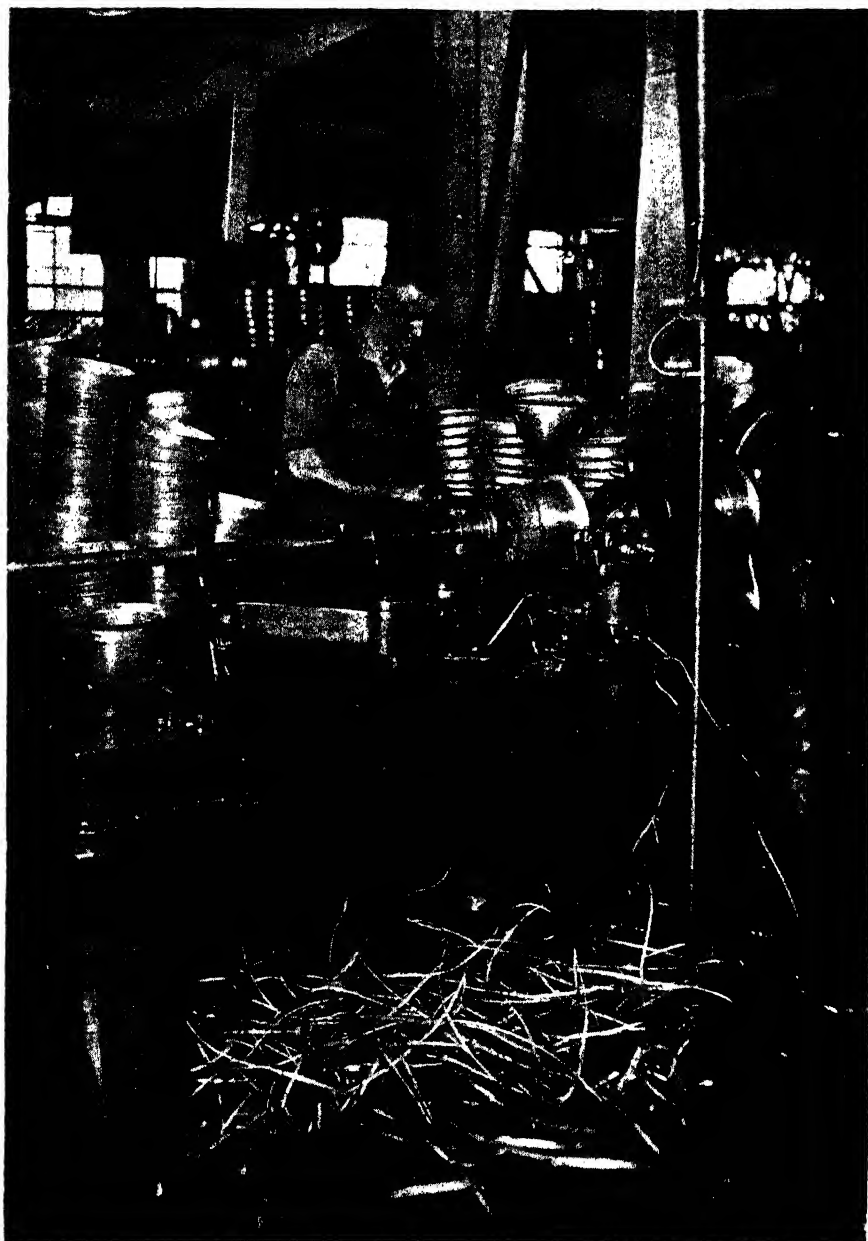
OPERATING TRIMMING AND BEADING TOOLS ON ALUMINIUM SAUCEPAN
